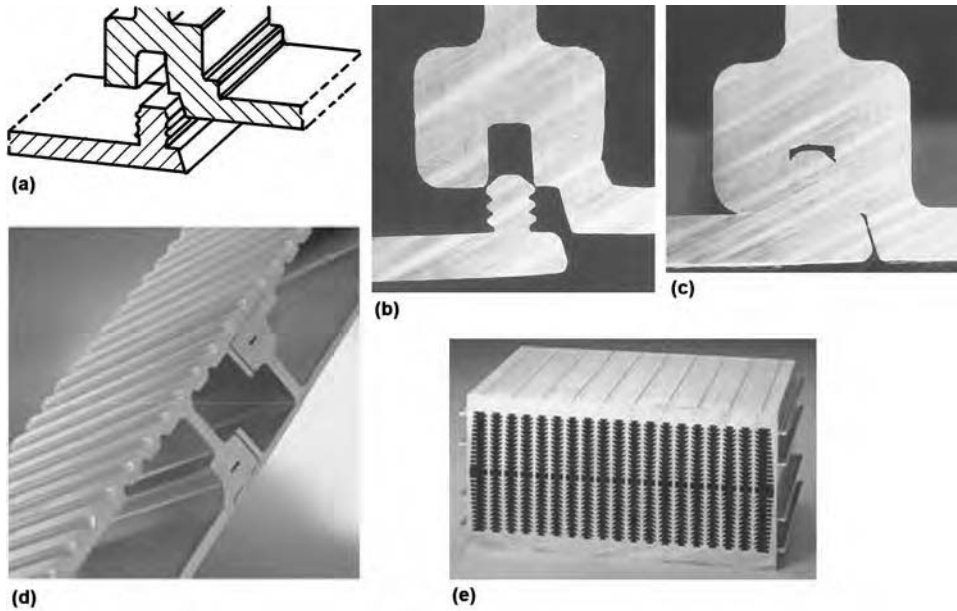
(a) and (b) Extruded groove and tongue for shear welding. (c) Assembled joint. (d) Sandwich constructions assembled by shear welding of extruded aluminum profiles. (e) Air cooler. Courtesy of Honsel. Source: Ref 19, 20
